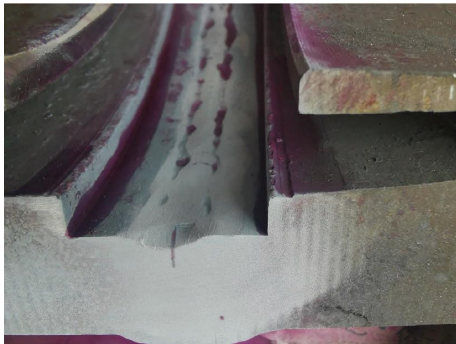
Crack at the root of the weld seam of throttling flowmeter.
